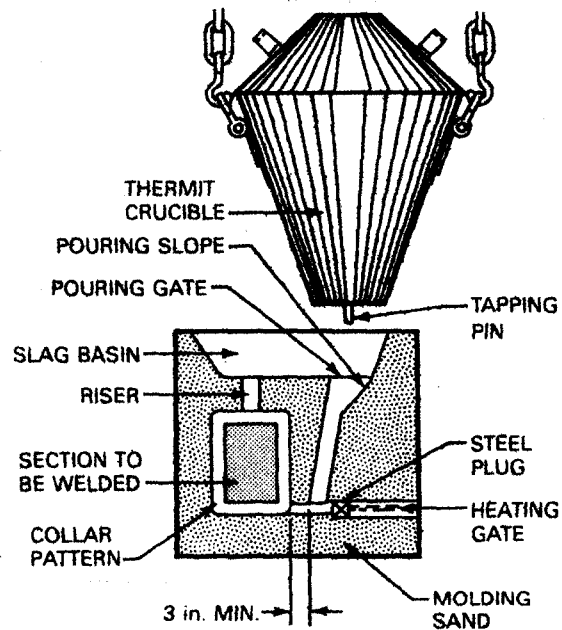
Cross Section of a Typical Thermit Mold for Repair Welding With External Preheat
